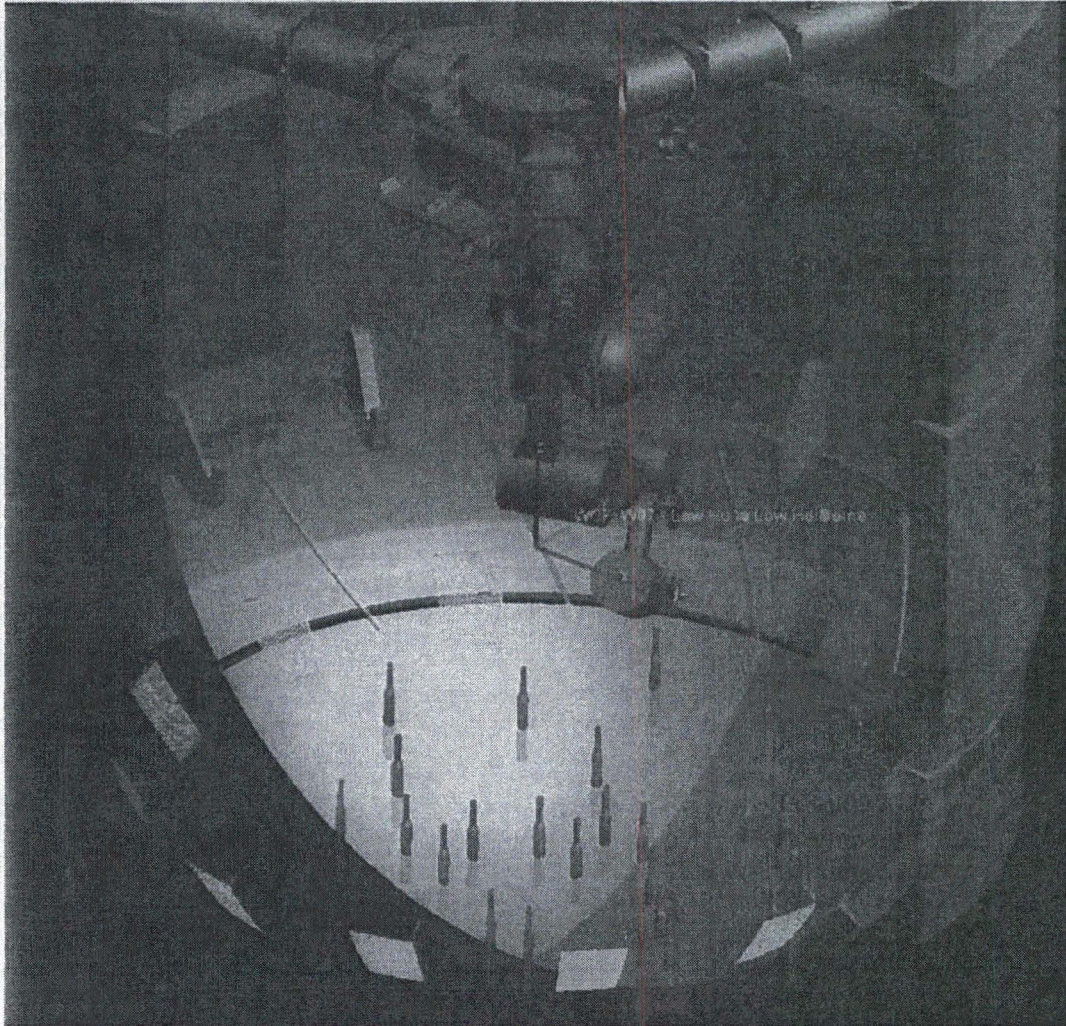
TWS Weld W06 – Lower Shell to Lower Head Weld
